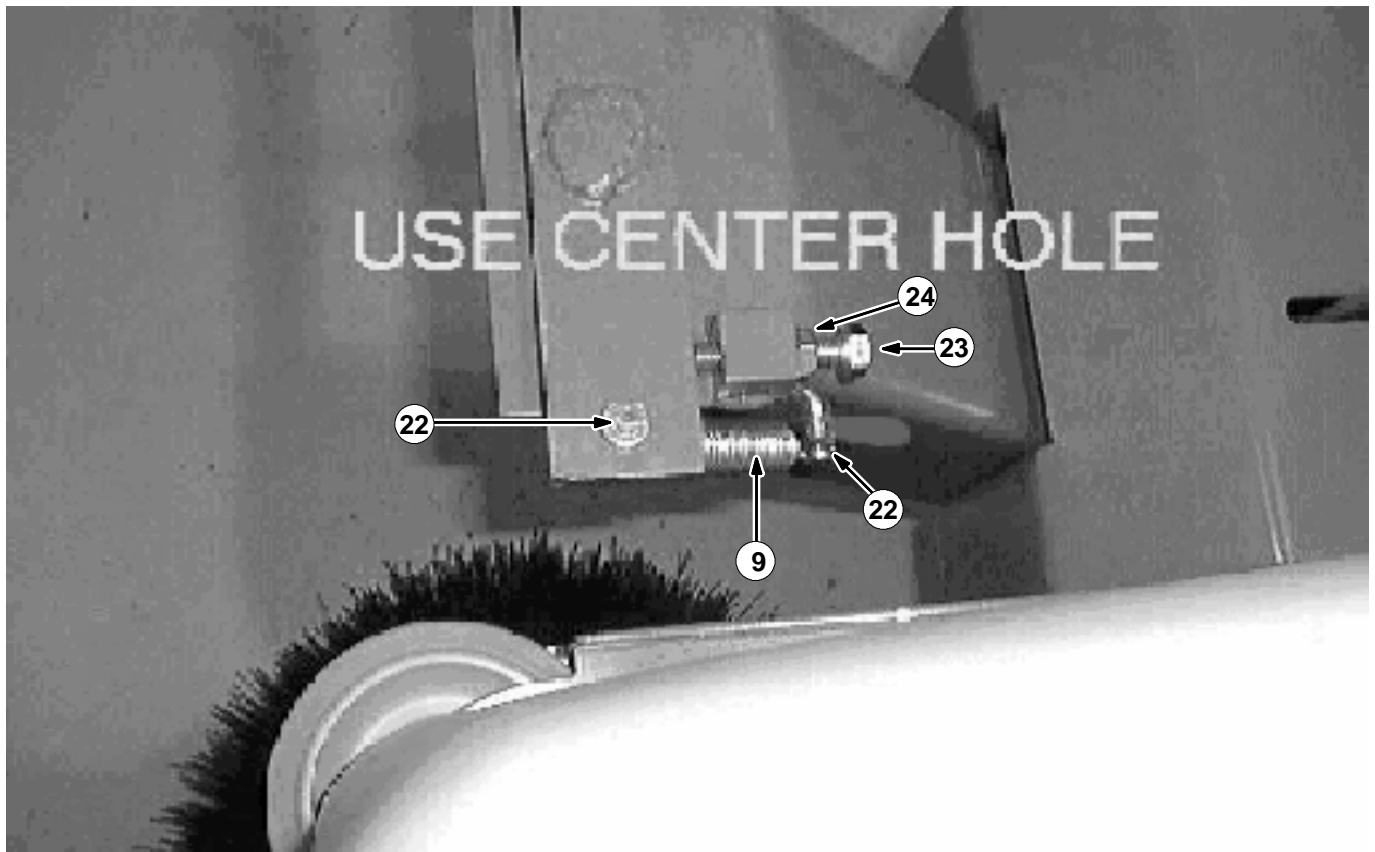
SUB ASSEMBLY INSTALLATION
